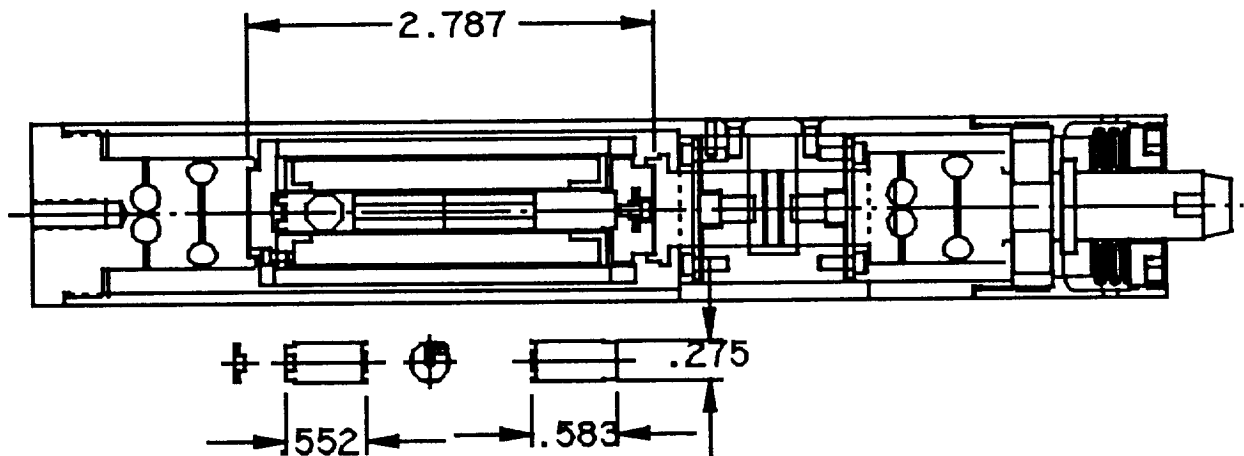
Drawing showing the adapters for the smaller terbium-dysprosium rod.
